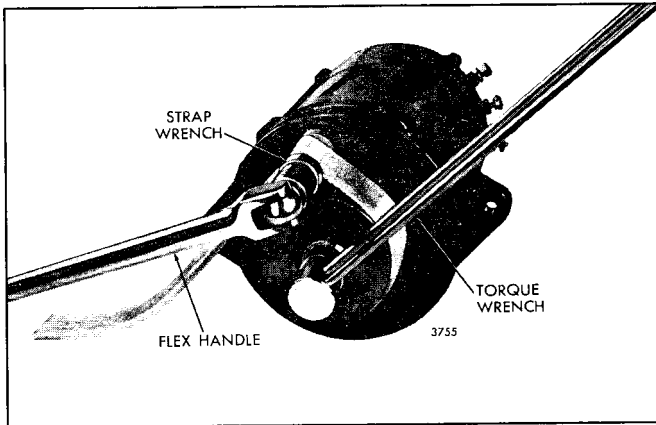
Tightening Alternator Pulley Retaining Nut
